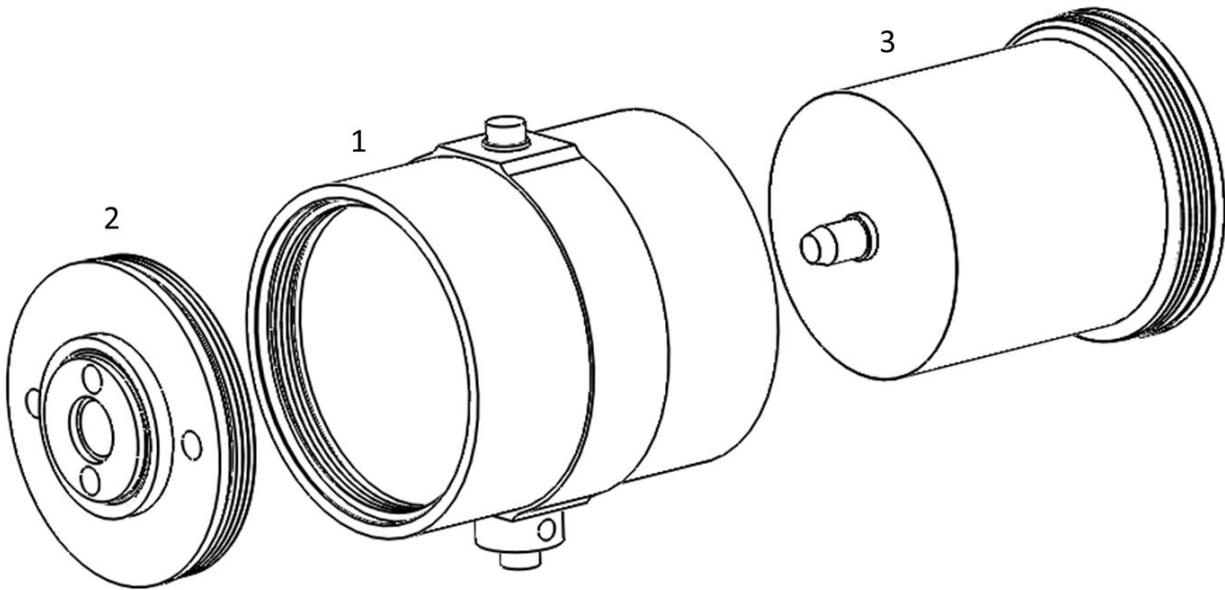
Exploded view of the V2Suit CMG spin assembly showing (1) the spin enclosure, (2) the spin bearing holder assembly, and (3) the spin motor mount assembly.
